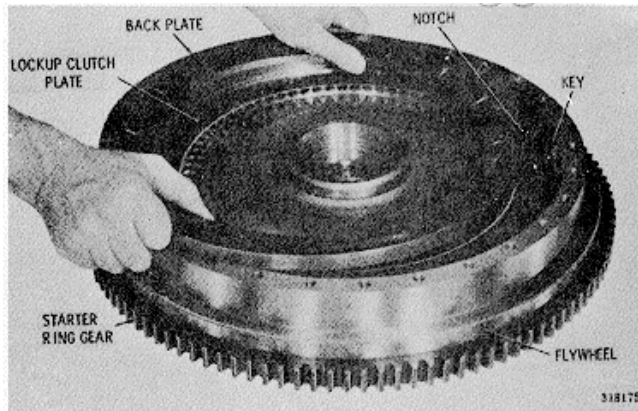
Removing (or installing) lockup clutch back plate .
